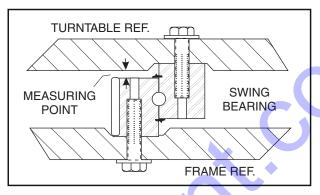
Swing Bearing Tolerance Measuring Point
